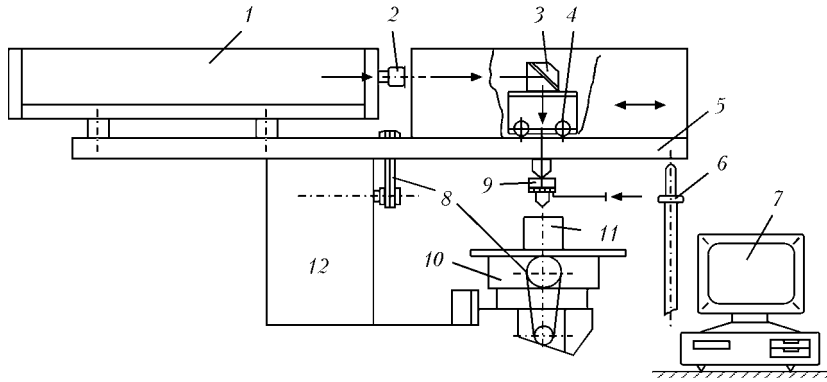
Diagram of a laser system and optical tract: 1 – laser resonator; 2 – telescope; 3 – angle mirror; 4 – carriage (Y-axis); 5 – console; 6 – support of adjustable console; 7 – management system of installation; 8 – drive; 9 – objective; 10 – horizontal table (X-axis); 11 – element node; 12 – frame
